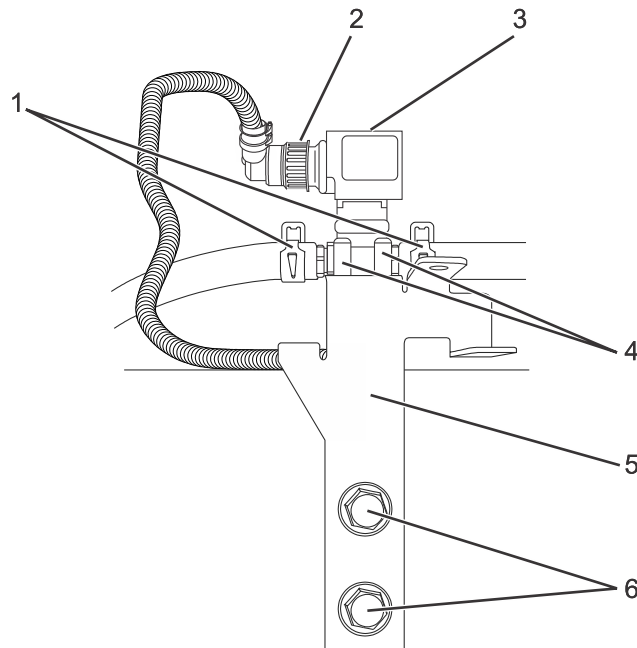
Diesel Exhaust Fluid (DEF) Tank Pickup Assembly.
